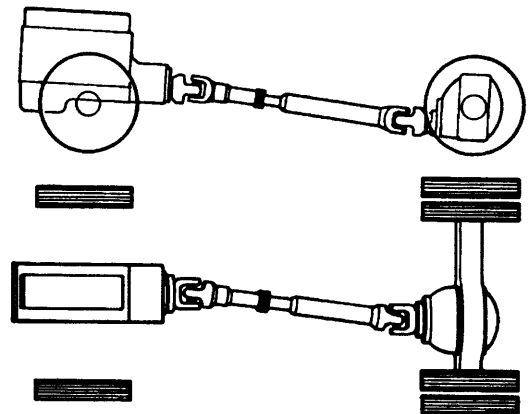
Two-Plane Angle Drive Shaft W4000037
